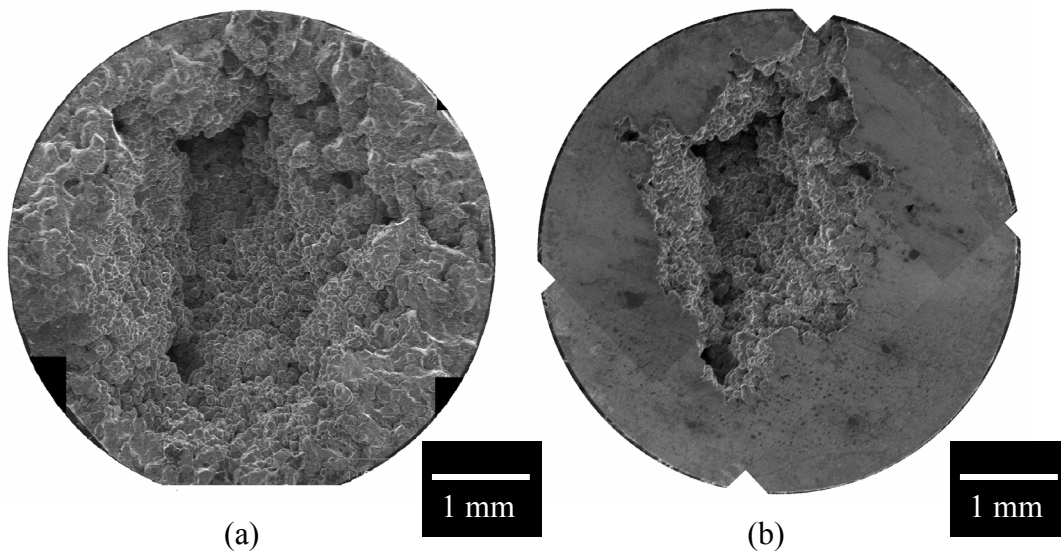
Macroporosity specimen (a) fracture surface with no signs of macroscopic fracture and (b) ground surface
